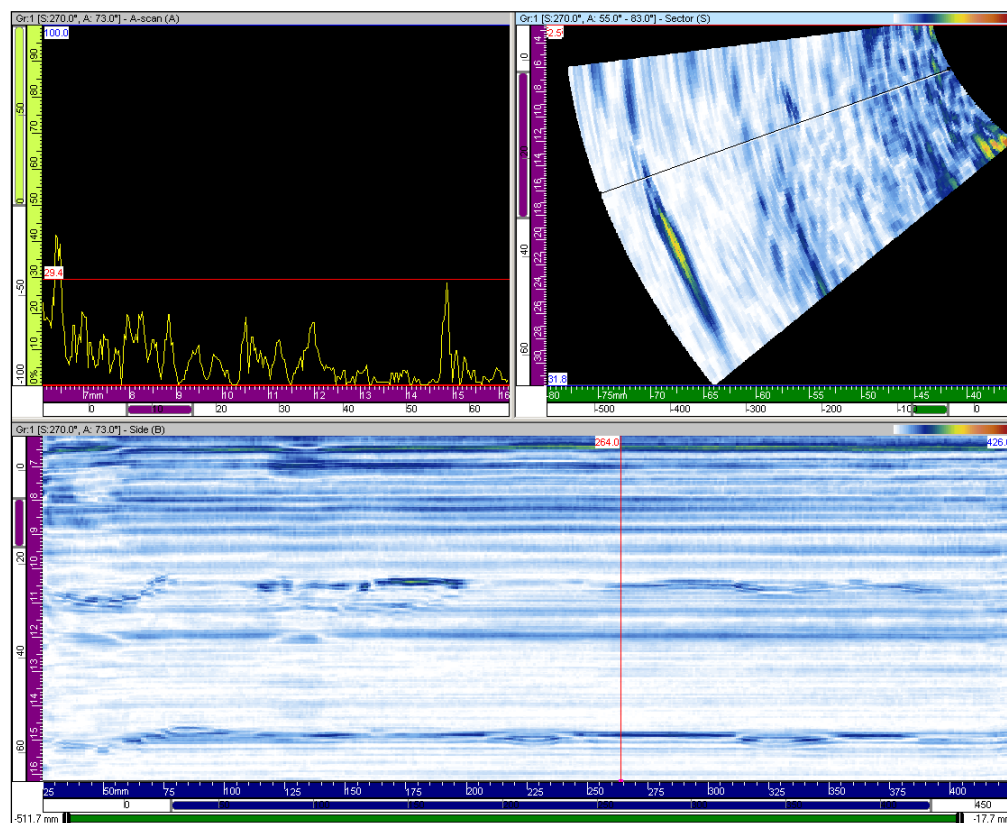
Signal from the weld cap on the internal surface of the plate. This is a geometrical feature that is present almost throughout the length of the weld.
